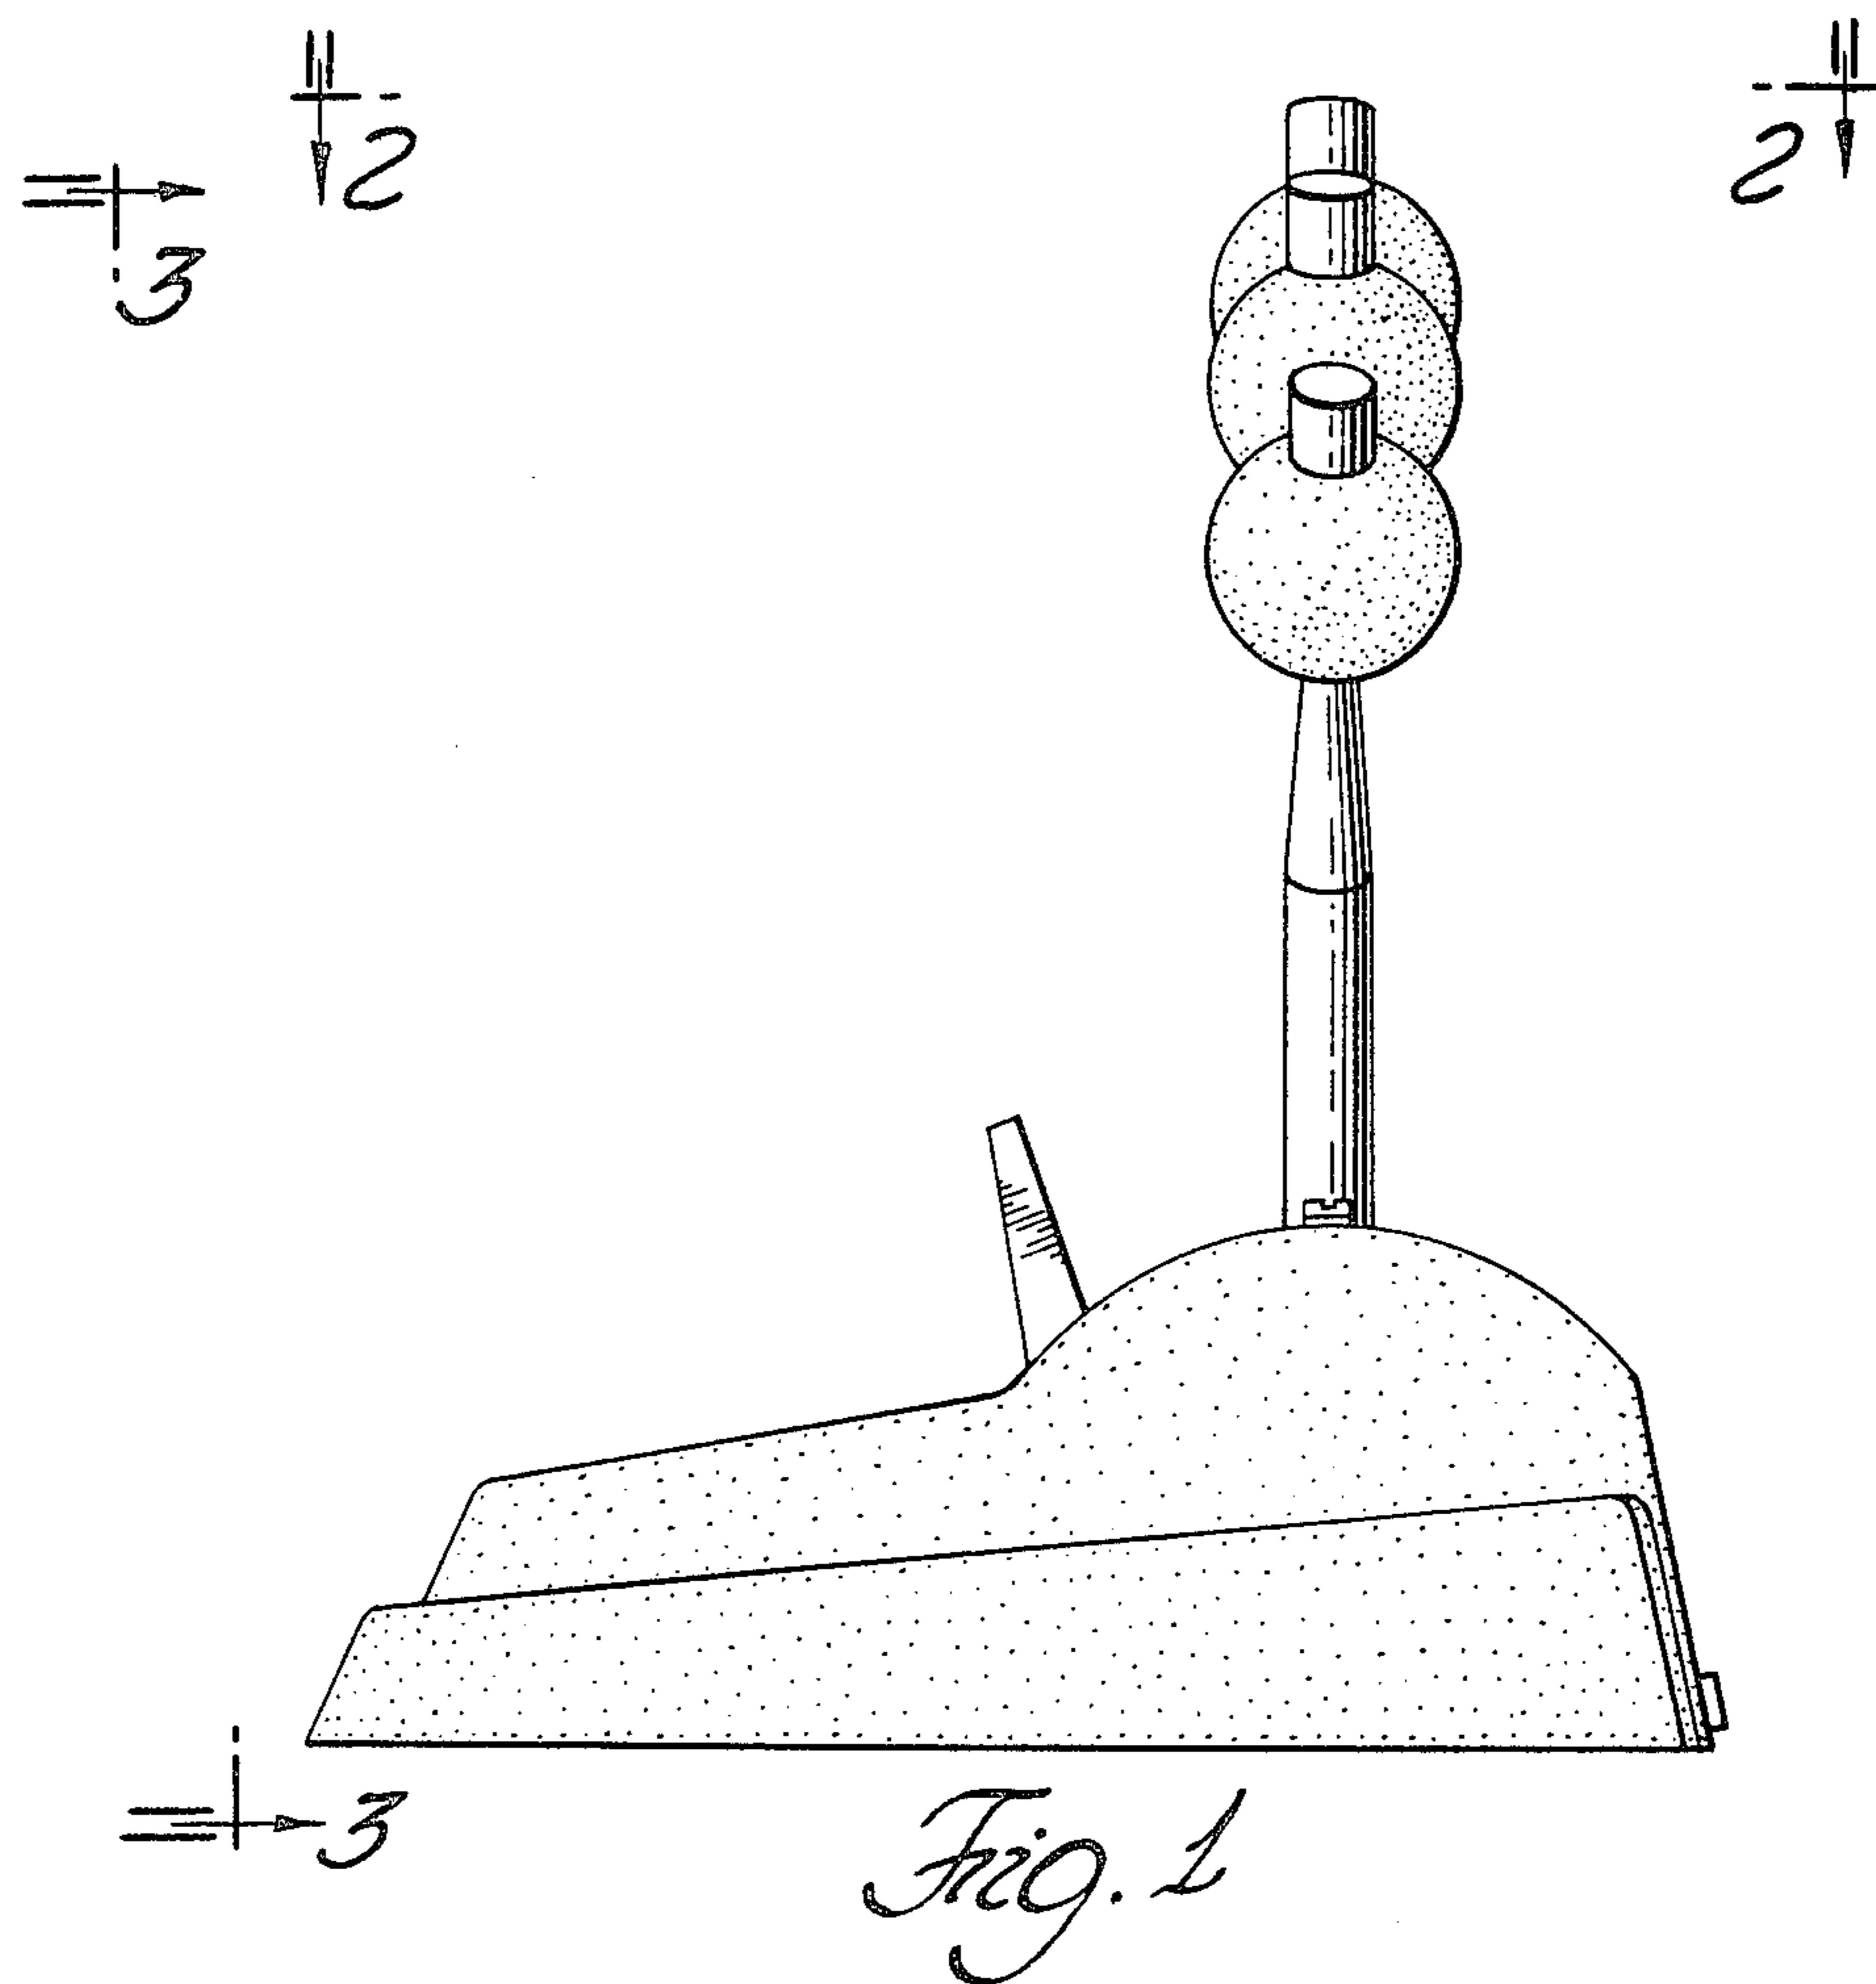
is a side elevational view of a shift control lever unit showing my new design;
